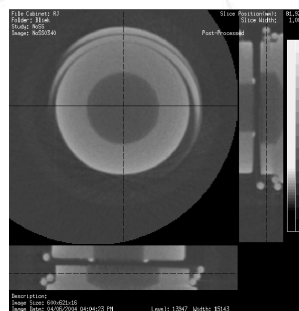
CT scan of the assembly, with only metal components visible shows that the cylinder is not properly aligned.
